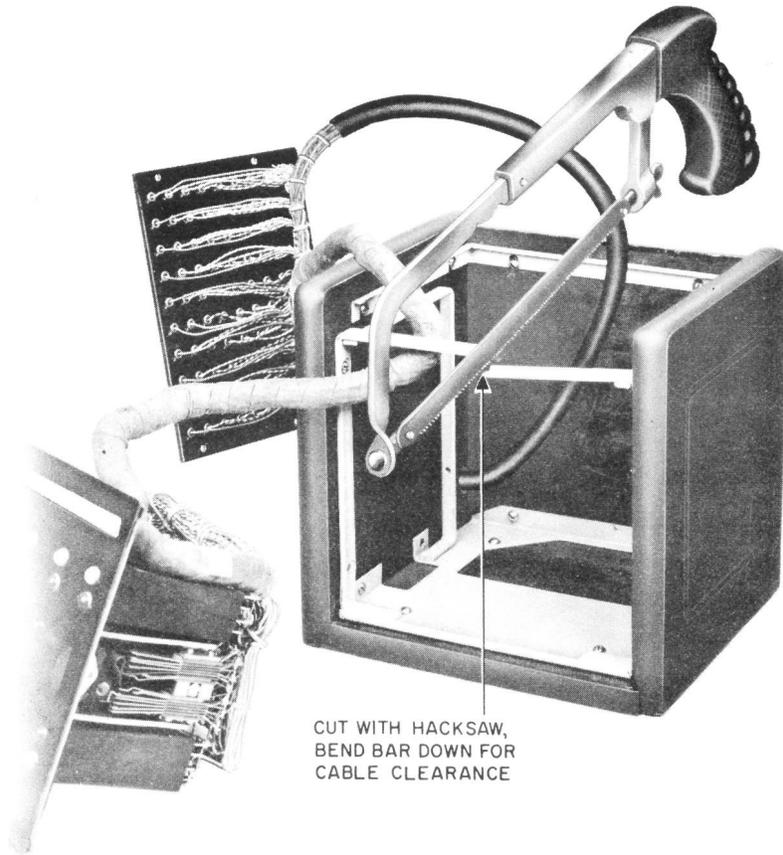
Preparing Wooden Key Box for Removal of Key Unit
